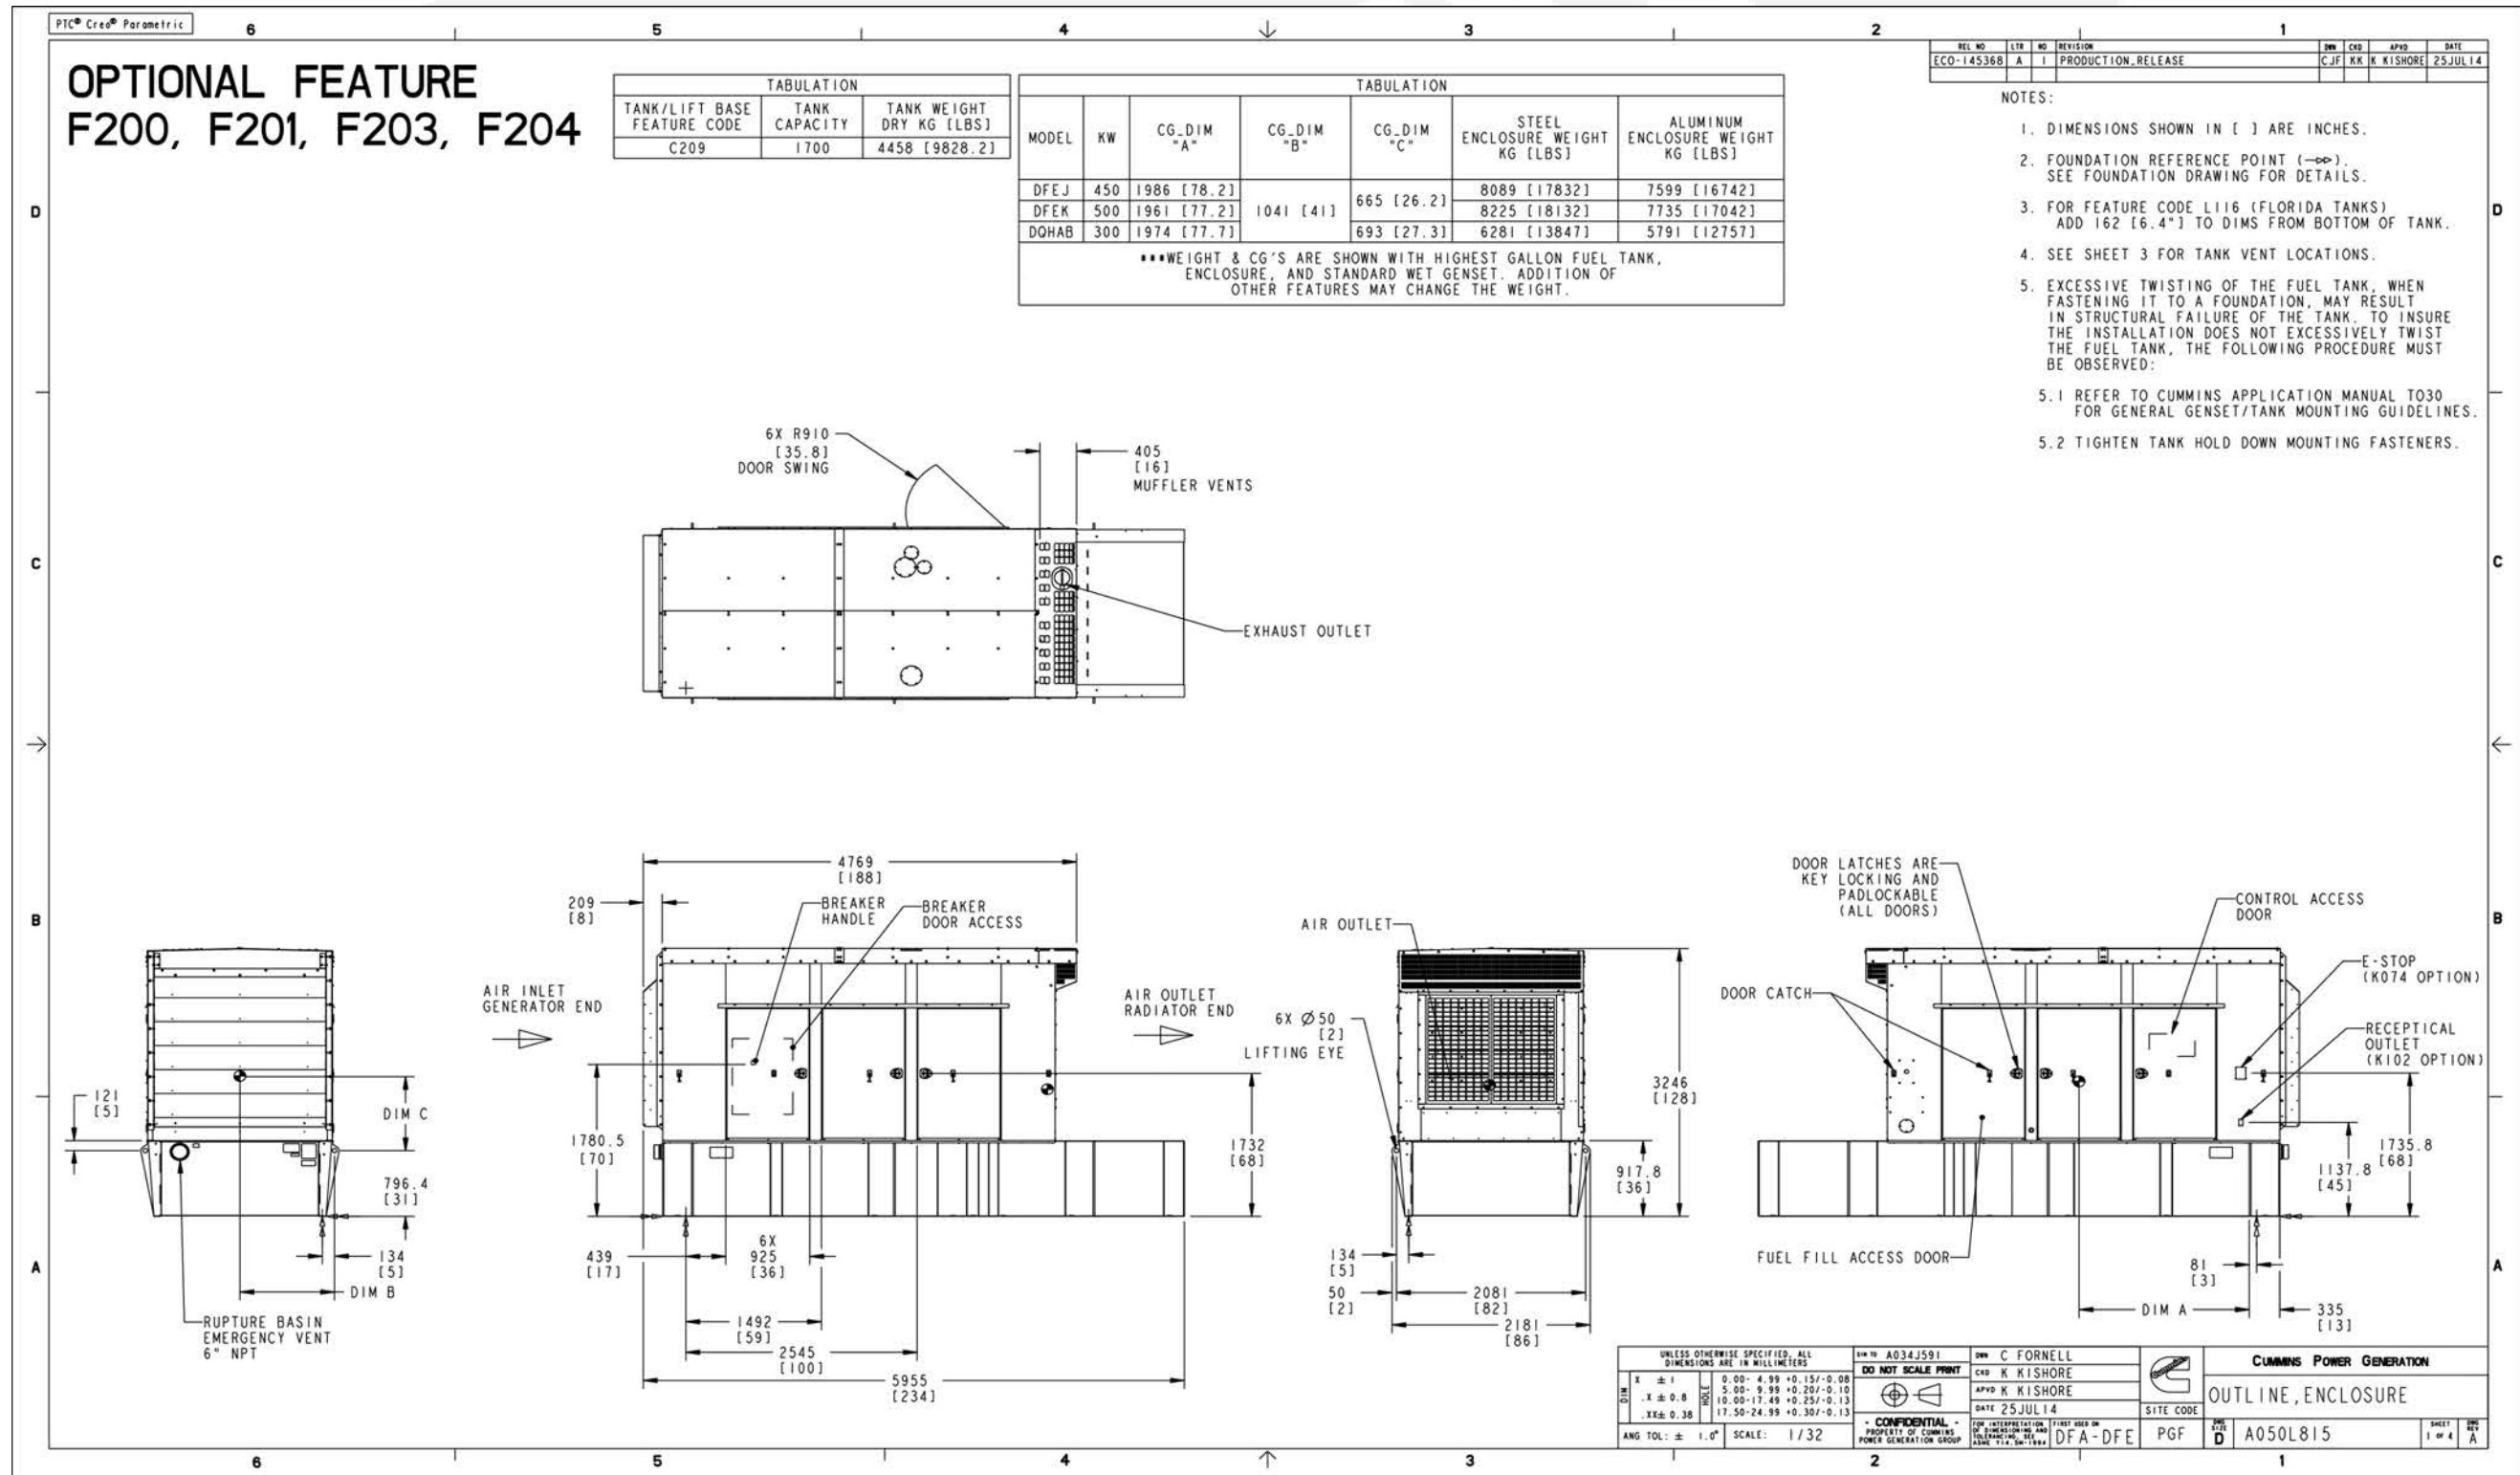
ENCLOSURE OUTLINE DRAWING F200, F201, F203, F204, F206 SHEET 1 OF 4
